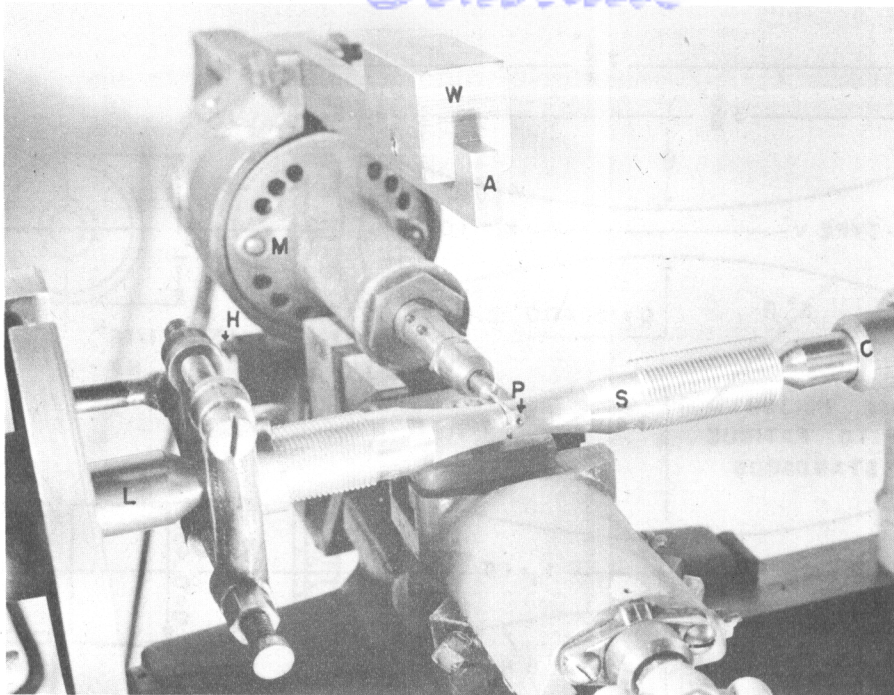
SPECIMEN NOTCH POLISHING SET-UP
